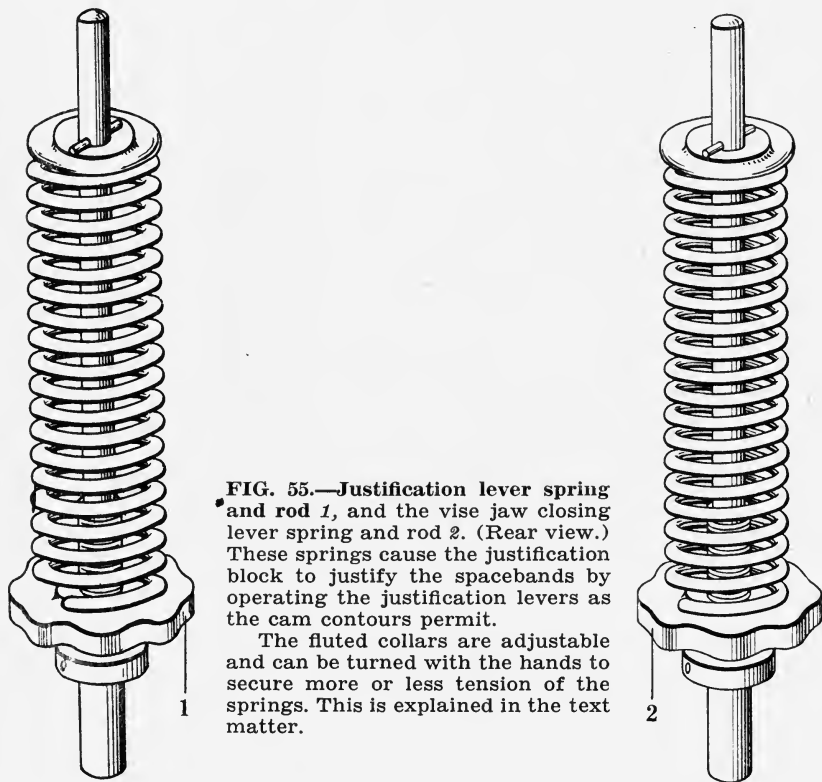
Justification lever spring and rod 1, and the vise jaw closing lever spring and rod 2. (Rear view.) These springs cause the justification block to justify the spacebands by operating the justification levers as the cam contours permit.
